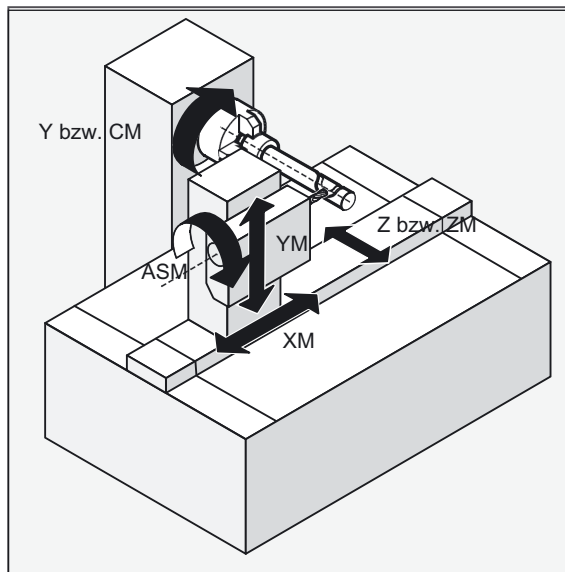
Special machine kinematics with additional machine Y axis (YM)
